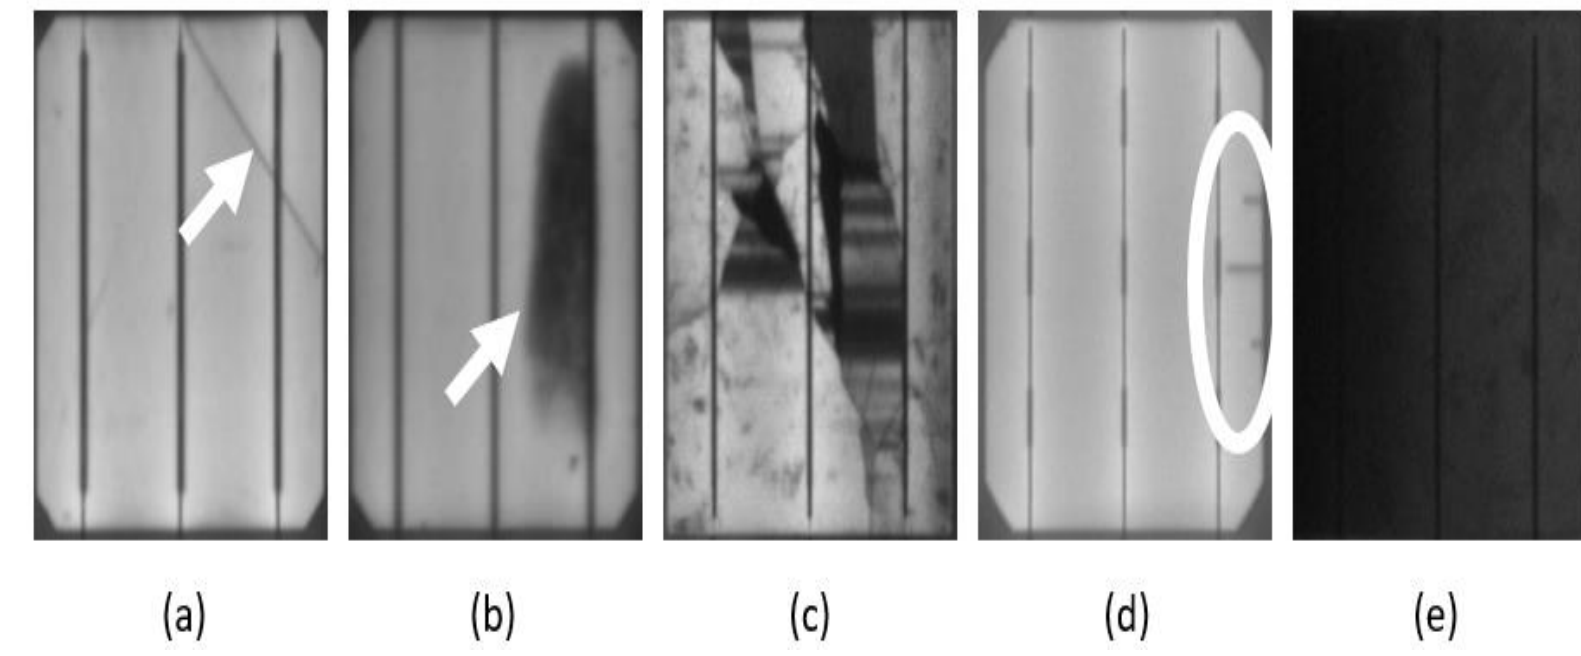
PV defect types investigated in this work: (a) Line cracks; (b) Soldering anomalies; (c) Complex cracks; (d) Edge ribbon cracks; (e) PID [2].
